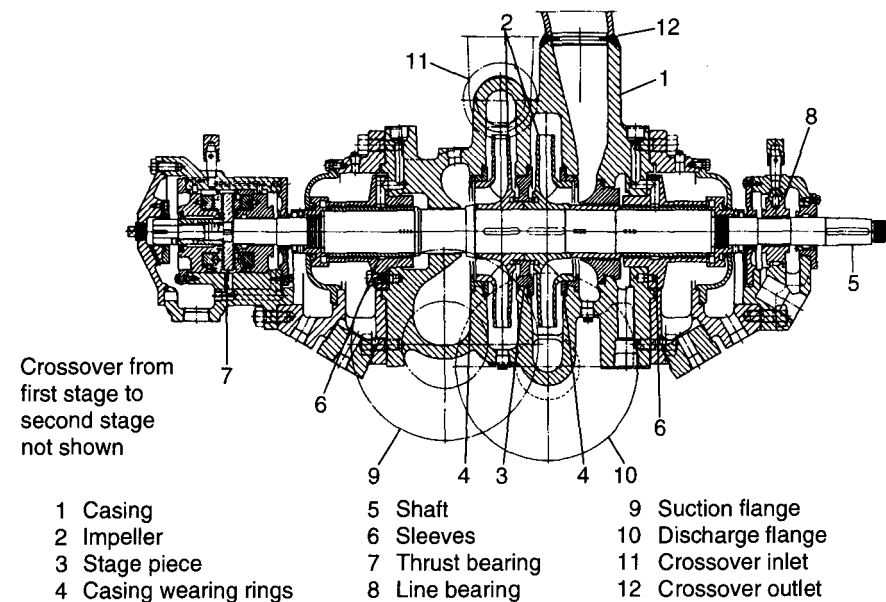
Multistage axially split volute-type centrifugal pump. Courtesy Ingersoll-Dresser Pump Company.
